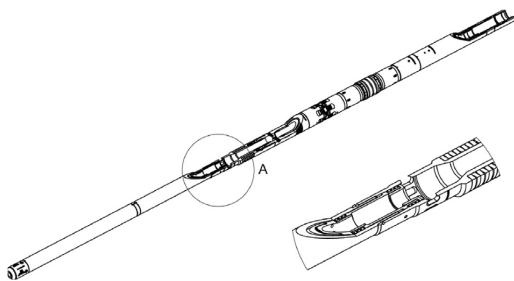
Quinterra Technologies shut-in valve type STC on an RPD type retrievable packer.
